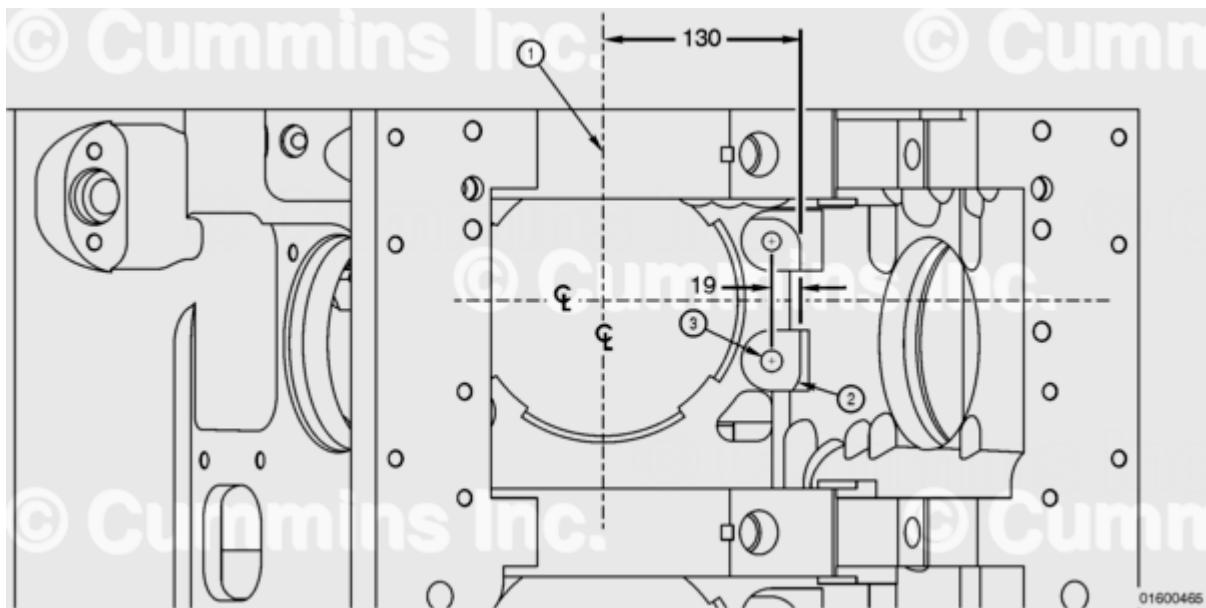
Lower Piston Cooling Nozzle Alternate Datum (1) Alternate Datum, (2) Corner can be removed, (3) M14 x 2 - 6H Thread.
